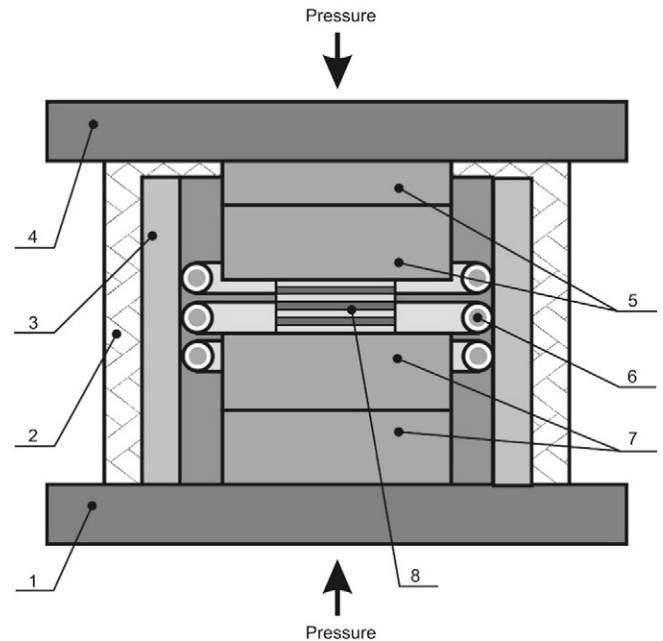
Scheme of the experimental furnace serving for sintering of multi-layered work pieces under the pressure: 1 – fixed plate; 2 – heat-insulation; 3 – furnace shell; 4 – movable punch; 5, 7 – insulation boards; 6 – nichrome heating elements; 8 – multi-layered sample.
